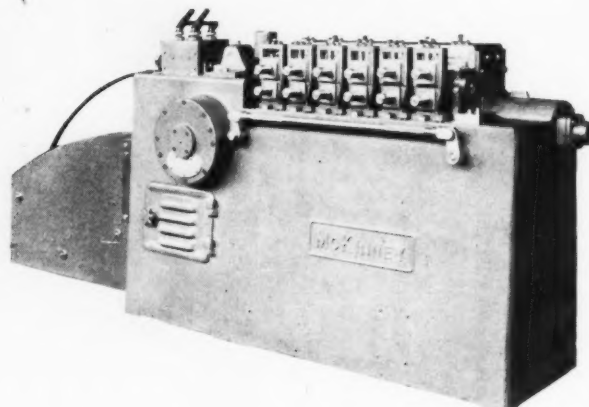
Flying shear cutoff is designed to operate only when material is of exact length
